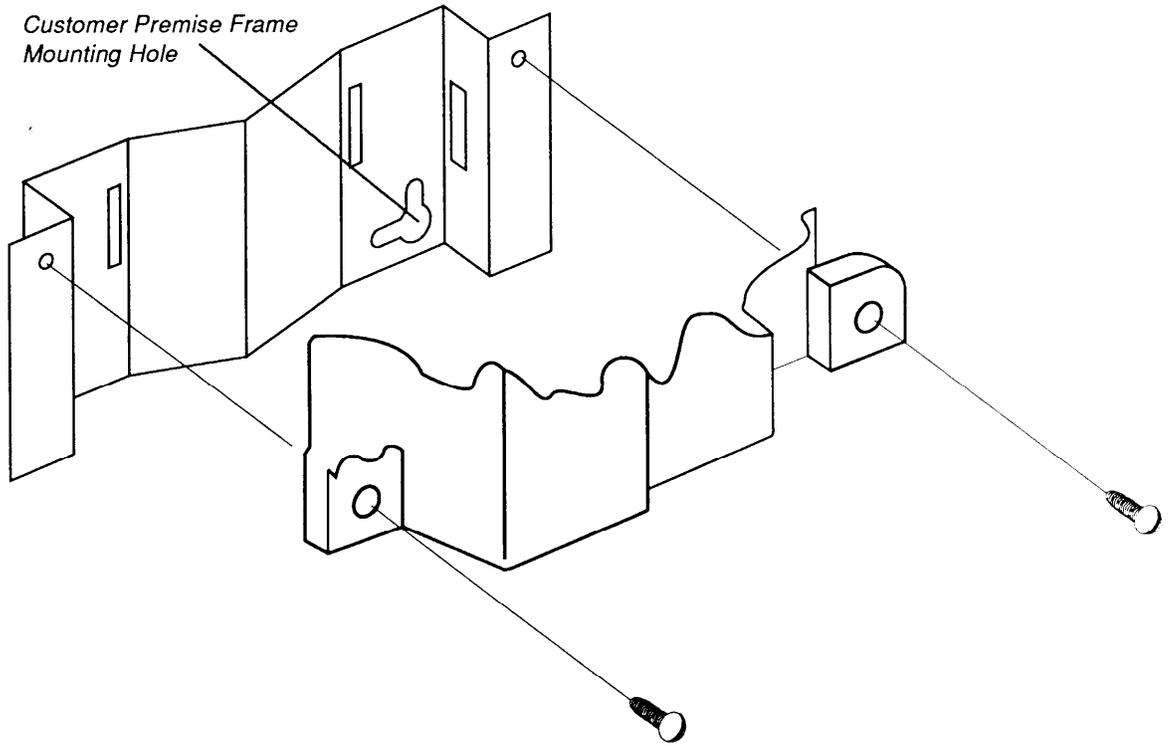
Mounting the SNI-2125 to the Auxiliary Mount Brackets.
